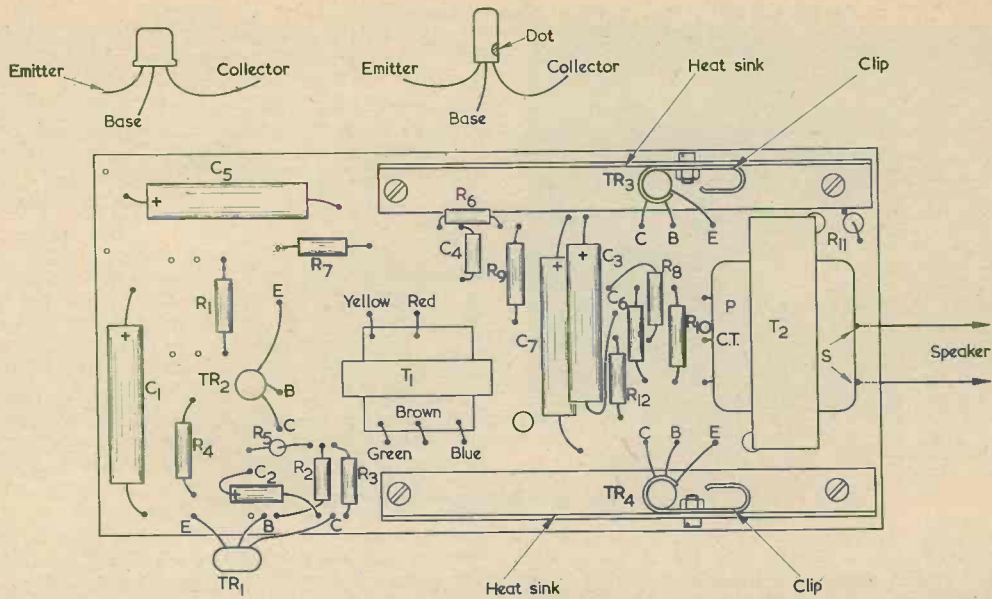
The components fitted to the circuit board. In some instances it may be preferable to mount R_1 away from the board
